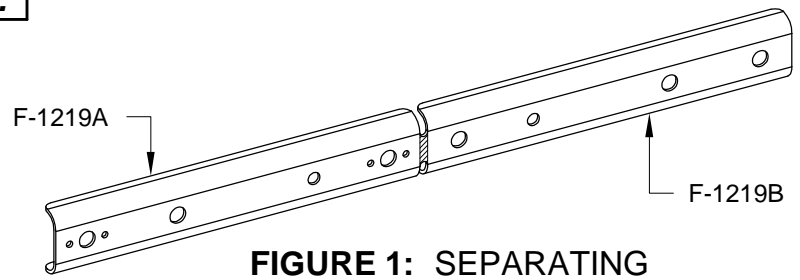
SEPARATING THE F-1219 FLAPERON MIXER ARM
